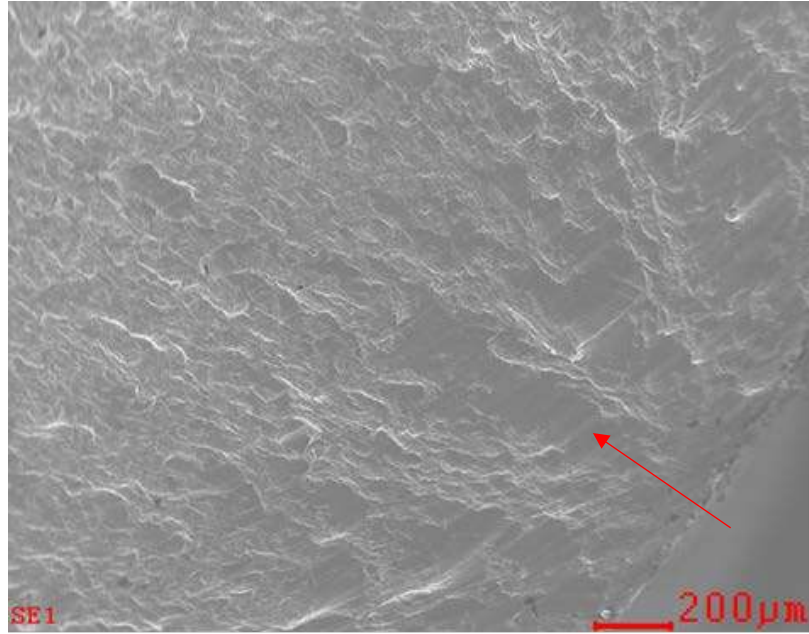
55.6 J/mm³ energy density 0° orientation fatigue fracture. Brittle fast fracture and final fracture zone. Final fracture zone identifiable to flat planar fracture surface, red arrow indicates.
